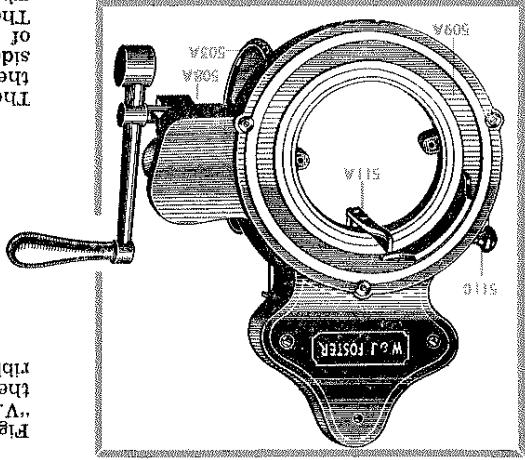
shows the base of the "V.A." knitting machine with the gear ring (509A) and the rubber post (511A) in position.
